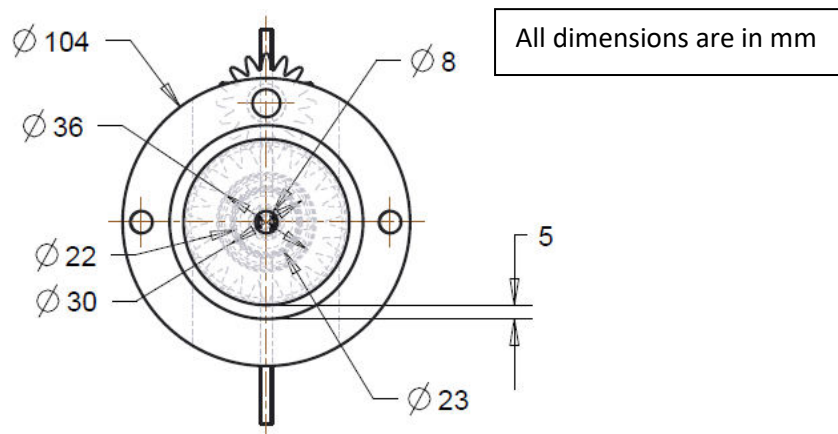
(a) - 5.8 (c) shows the fixture arrangement for the present invention. The fixture is divided in three parts (top fixture, middle fixture and bottom fixture). The fixture assembly contains gears, bearings, electrode, and workpiece in it. Figure 5.8 (c) shows the top view of the Fixture which is held between the media cylinders.
